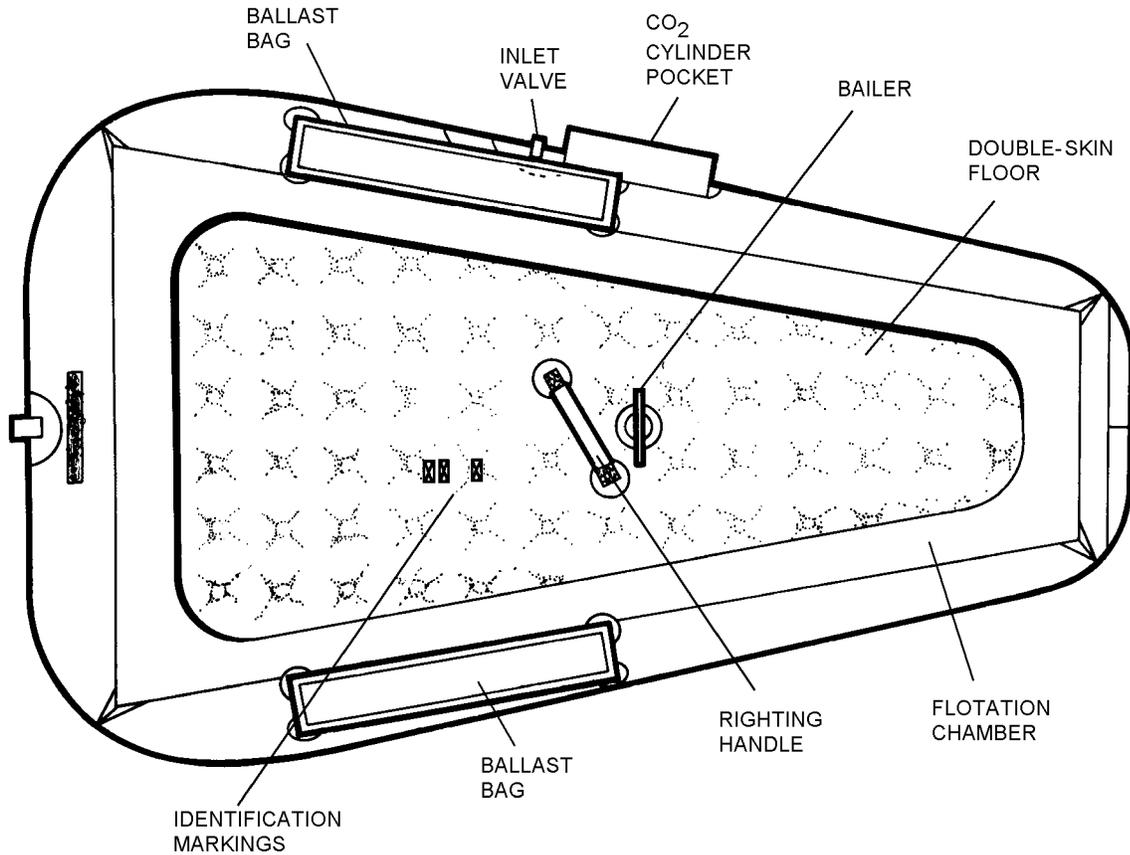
LRU-23/P Liferaft Assembly Components and Parts (Sheet 2)
